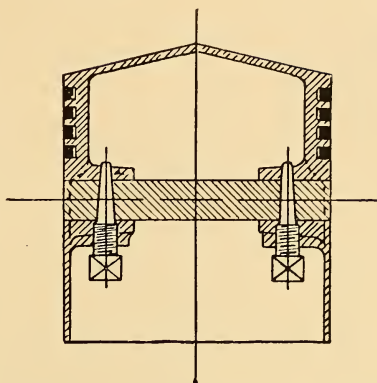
Typical piston of petrol engine showing covering of head and method of fastening the gudgeon pin upon which the connecting rod works.
